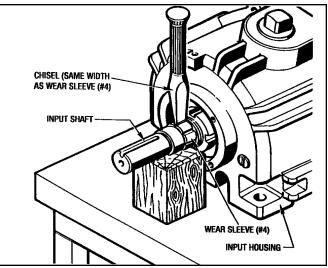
Wear Sleeve Removal (#11 and 14 Posidyne)
